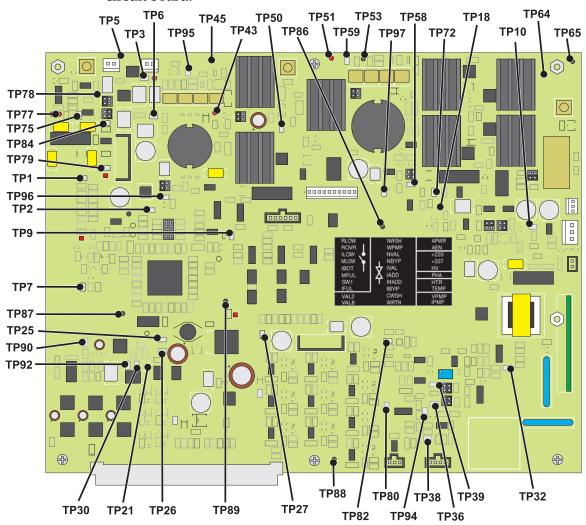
Test Point Locations on Print Engine Circuit Board
